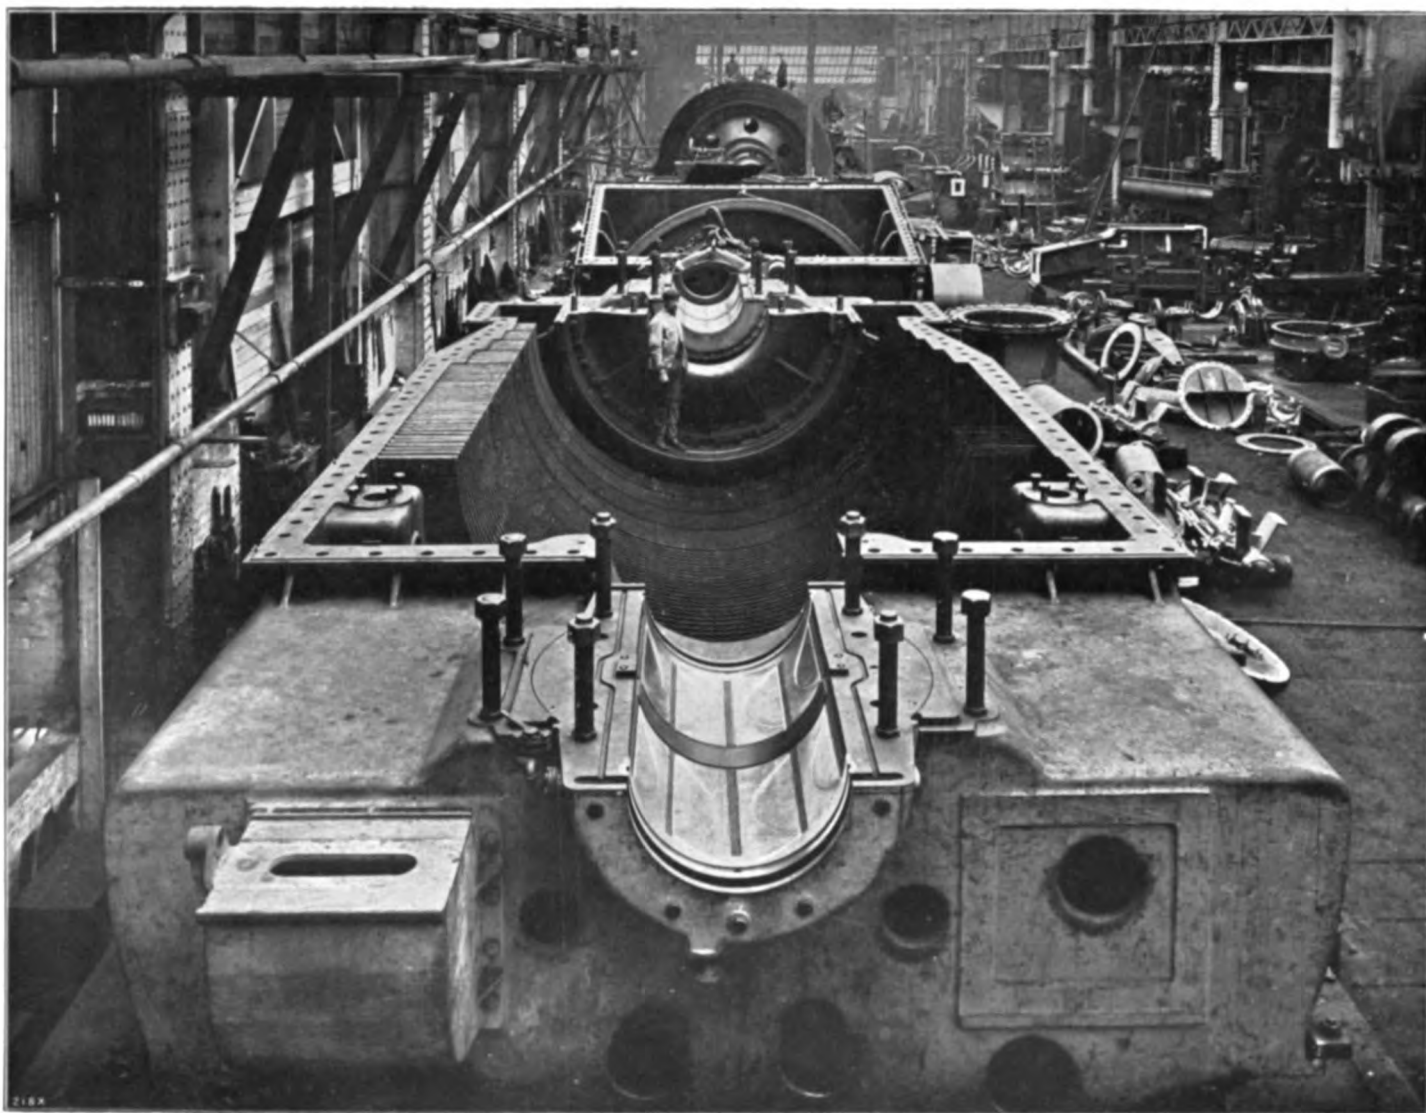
BOTTOM HALF OF CASING OF LOW-PRESSURE TURBINE.
